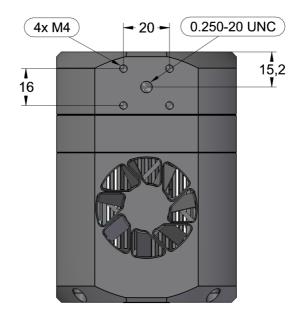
Threaded mounting holes on the C1× camera head bottom side
